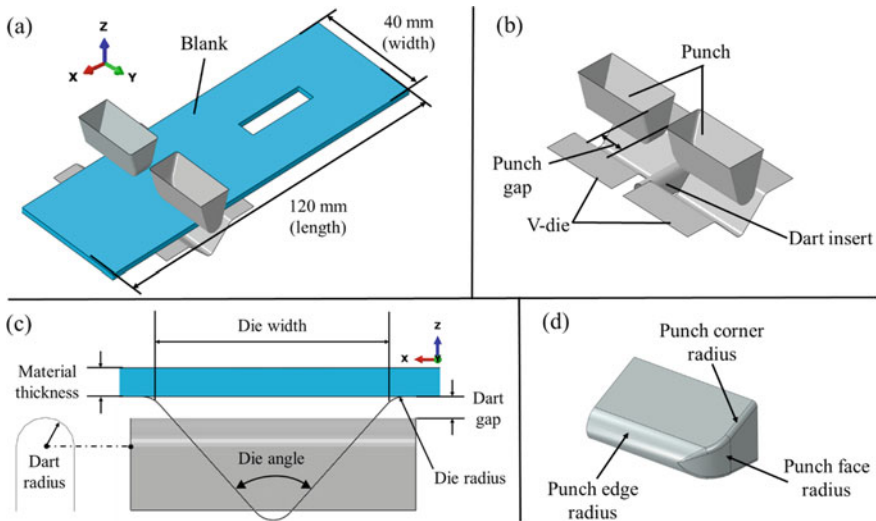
a FE simulation setup of the press brake operation; b tooling for the stiffening dart formation; c die and dart insert variables; and d punch variables
